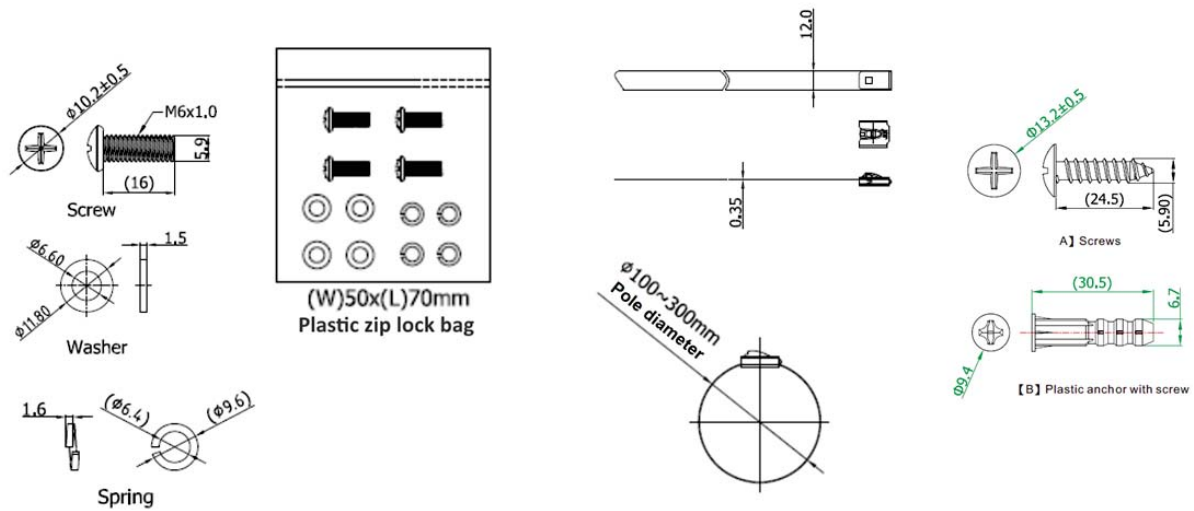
Mechanical drawings: screw, spring washer, washer, hose clamp, anchor & screw
